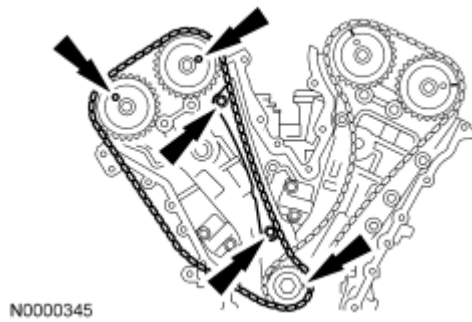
Aligning Marks On Timing Chain With Marks On Camshaft & Crankshaft Sprockets
